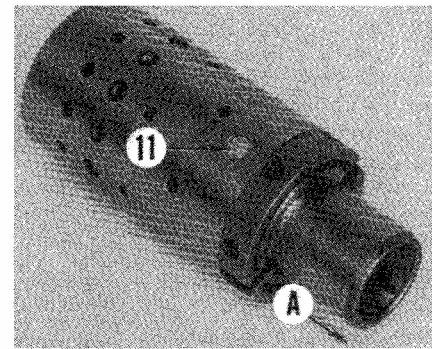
View of control spool and sleeve assembly. Teflon discs (11) cover outer ends of internal pin. Withdraw spool from sleeve in direction of arrow (A).
